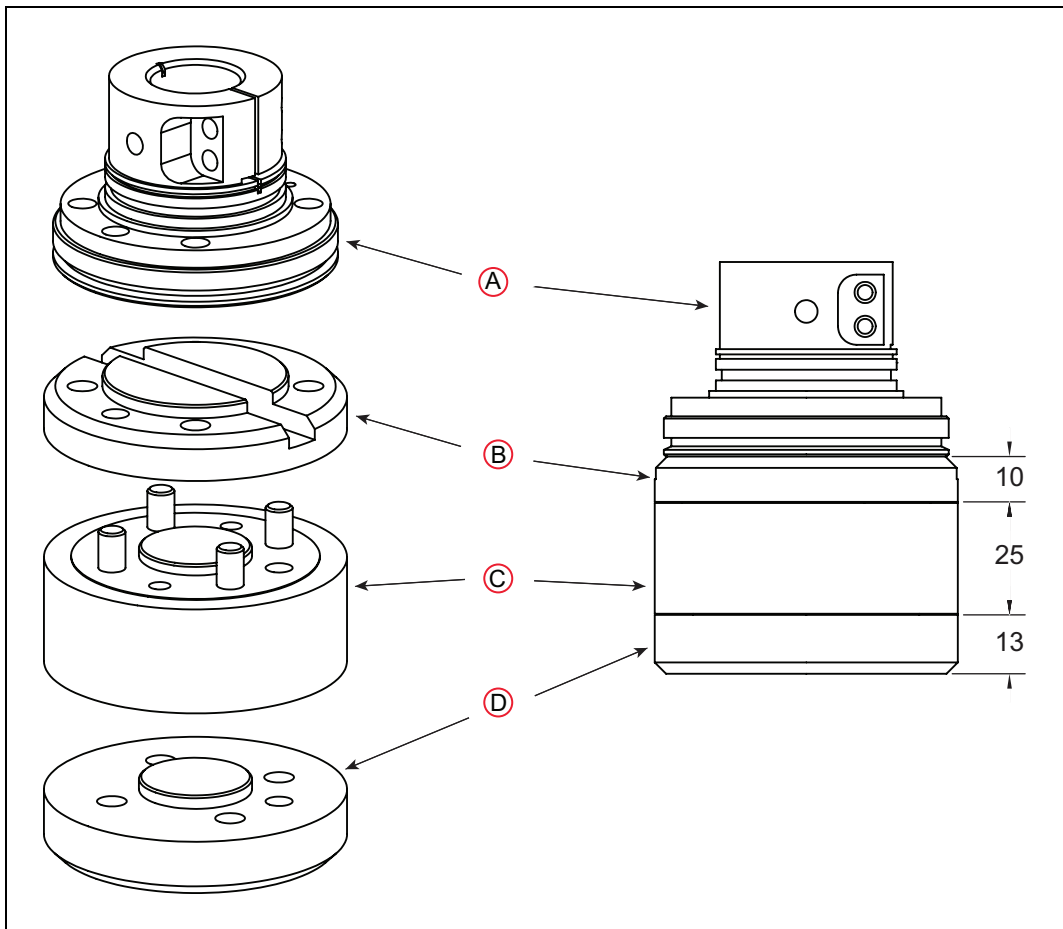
Side View, eCobra, Quattro, and Hornet Sensor, Adapters, and Robot Flange. Units in mm.
